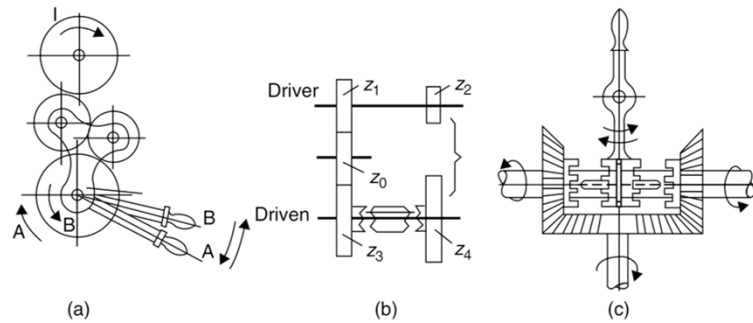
Reversing mechanisms: (a) tumbler yoke gear, (b) spur gear with clutch, and (c) bevel gear with clutch.
